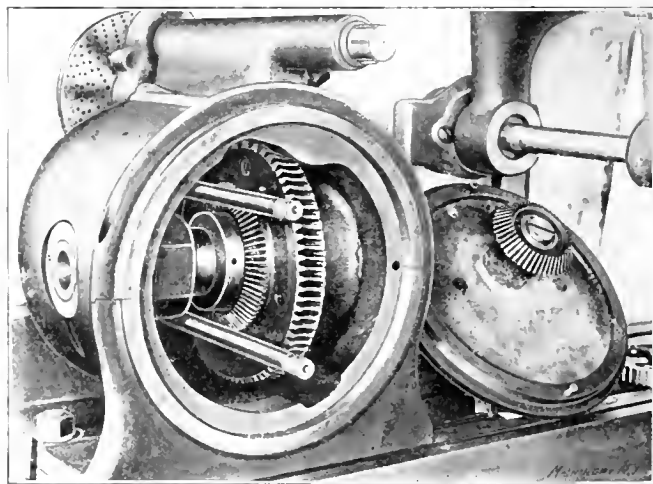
Back Cover Removed, showing Clamping Bolts and Dividing Head.
